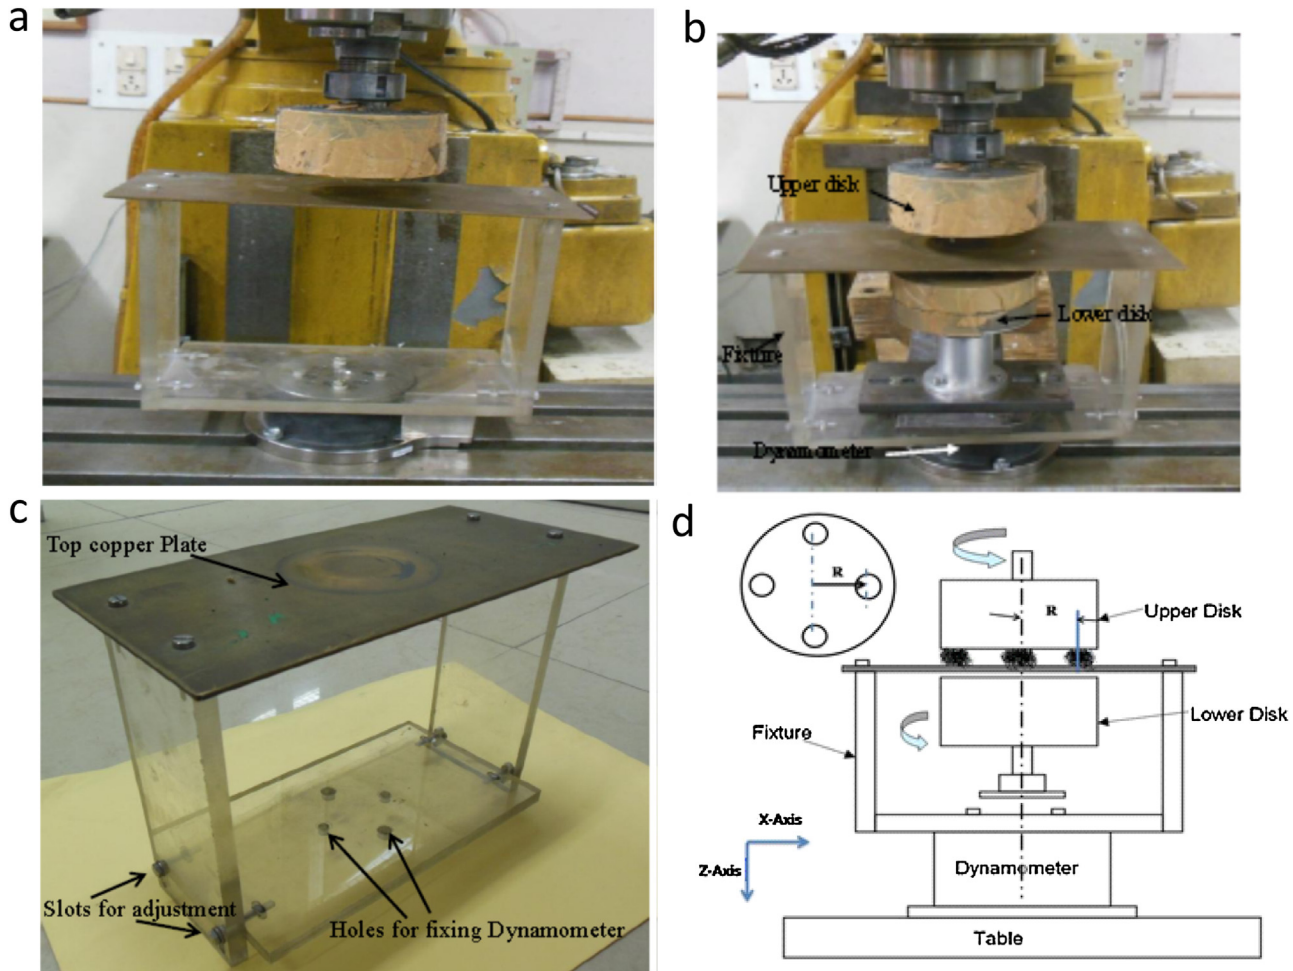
Setup used for measuring forces for magnetic abrasive finishing and double disk magnetic abrasive finishing (a) Setup for measuring force in magnetic abrasive finishing; (b) Setup for measuring forces in double disk magnetic abrasive finishing; (c) Fixture for accommodating dynamometer; (d) Schematic view showing arrangement of dynamometer and fixture in double disk arrangement.
